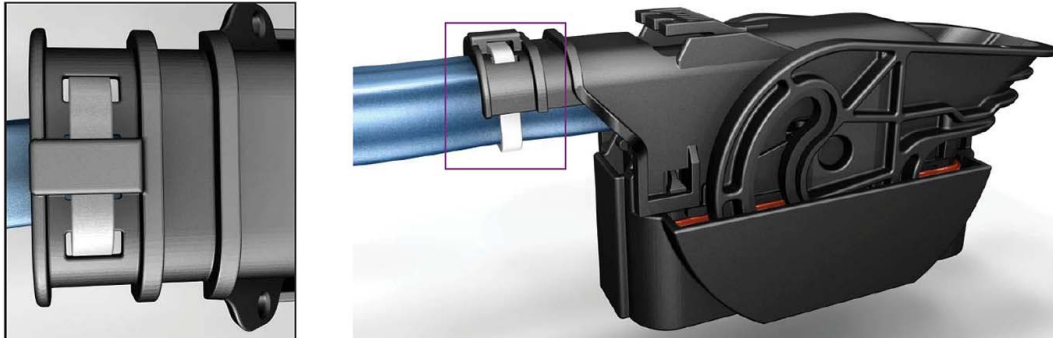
Cable attachment in the 38-way connector in case of reduced wiring harness diameter
